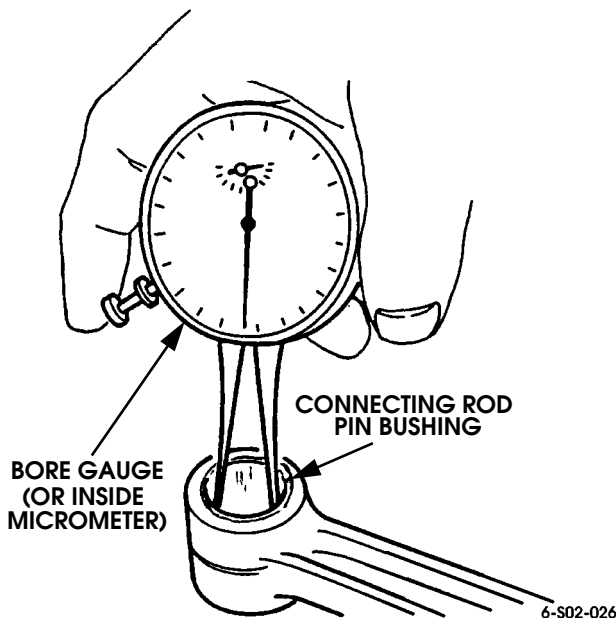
Checking Connecting Rod Pin Bushing Diameter
